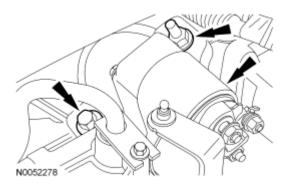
Identifying Bolt, Stud Bolt & Starter Courtesy of FORD MOTOR CO.
